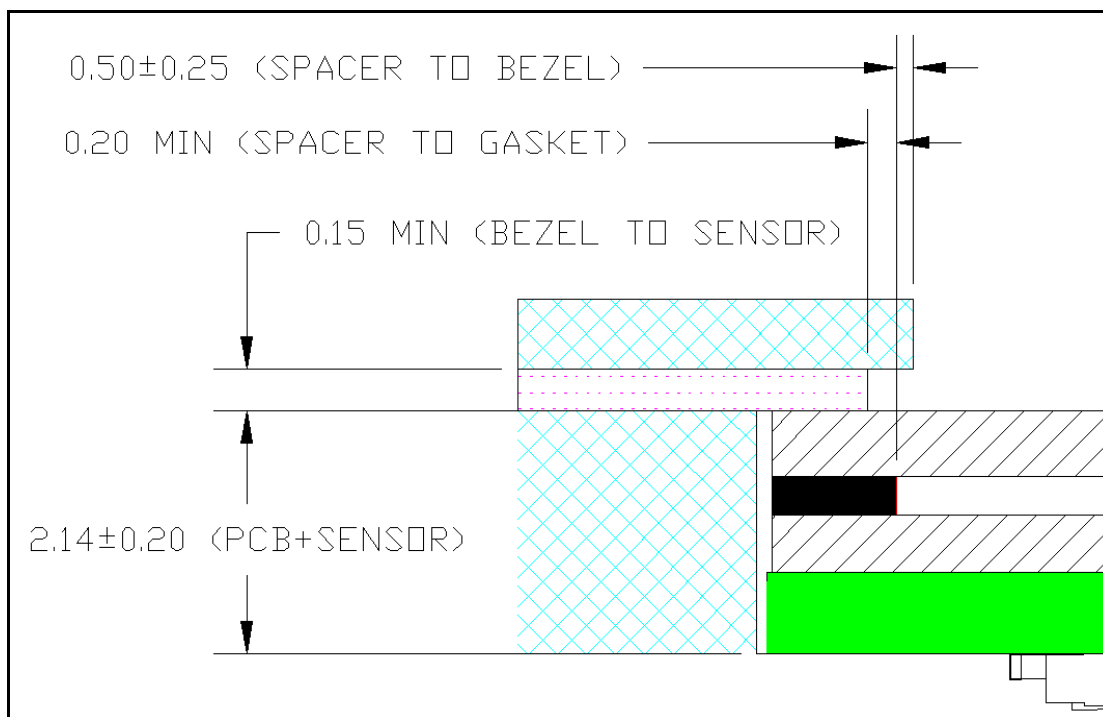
Critical capture dimensions. All dimensions are in mm. Drawing not to scale.
